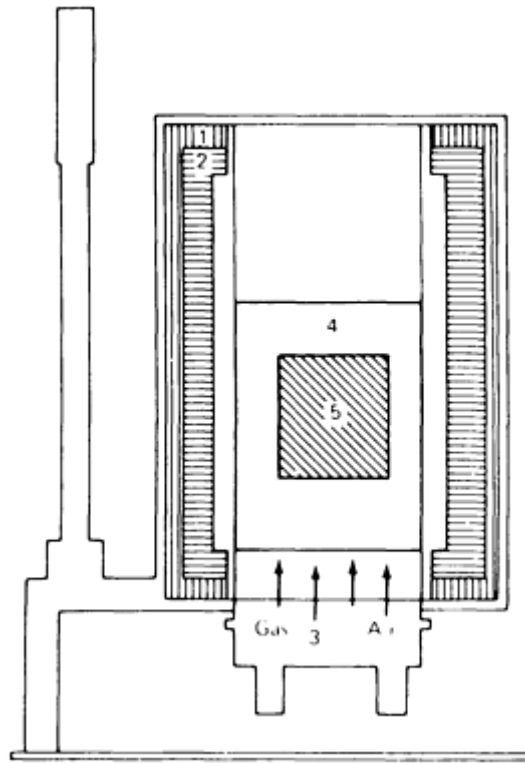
Gas-fired fluidized-bed furnace with internal combustion. 1, insulating lagging; 2, refractory material; 3, air and gas distribution box; 4, fluidized bed; 5, parts to be treated
